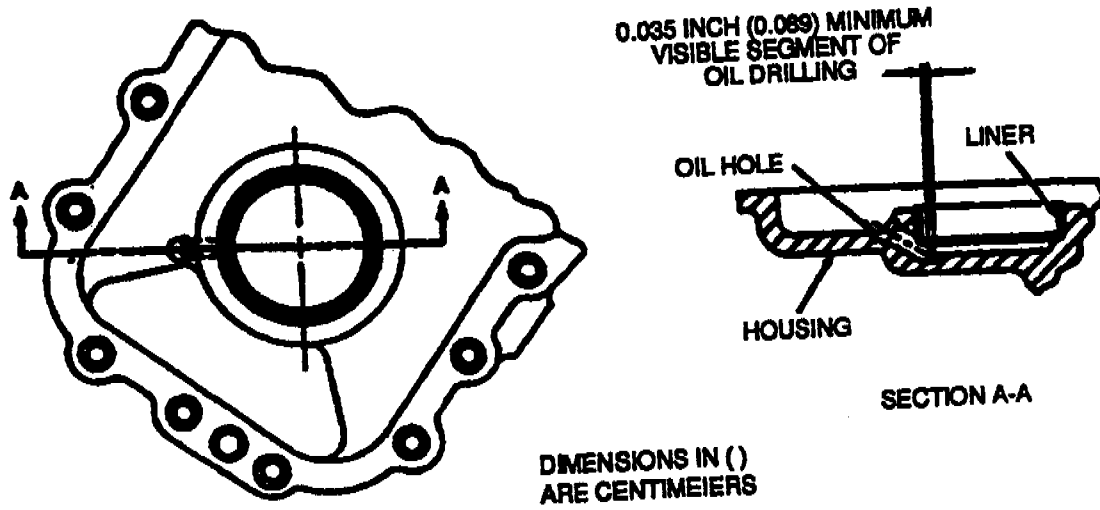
Rework of Oil Hole In Accessory Drive Gearbox Housing.
